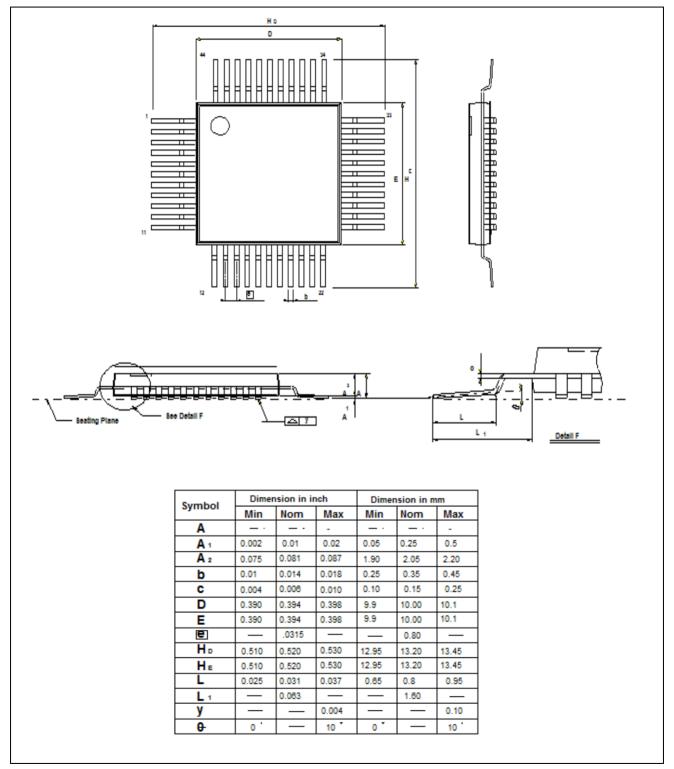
PQFP44 (10x10x2.0mm, footprint 3.2mm) Package Dimension
